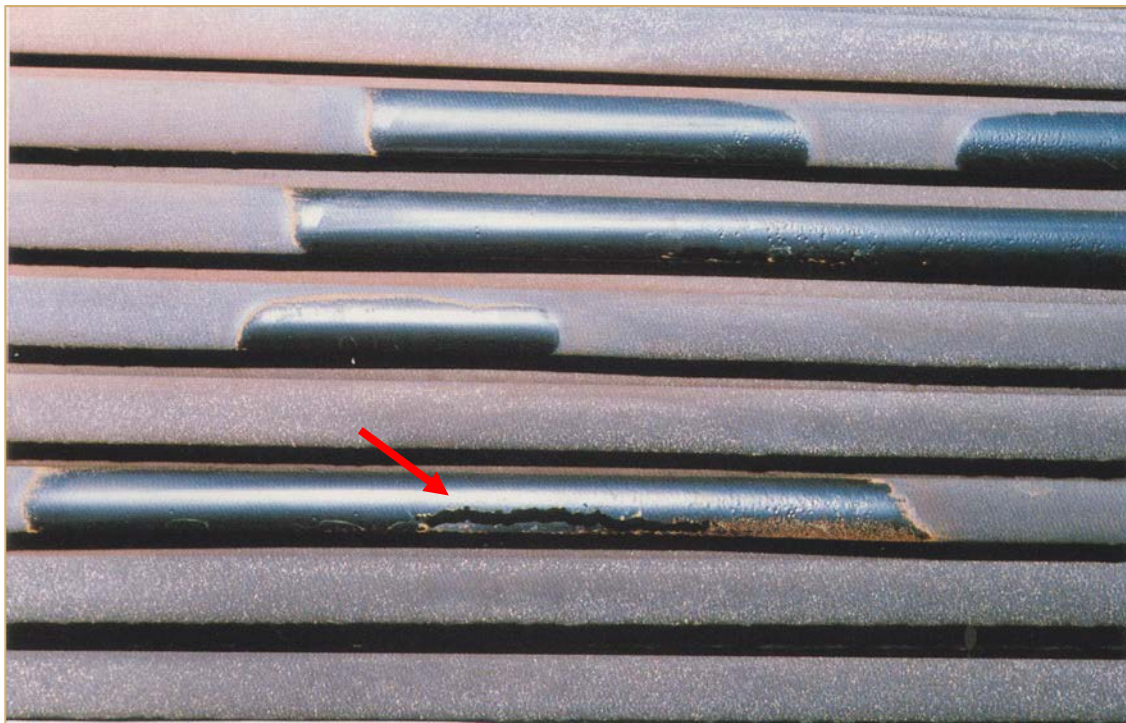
The tube bundle exhibits here and there, smooth and oxide-free surfaces, made thinner by corrosion-erosion up to through-wall (red arrow) at some places [Mousset, 1990].
